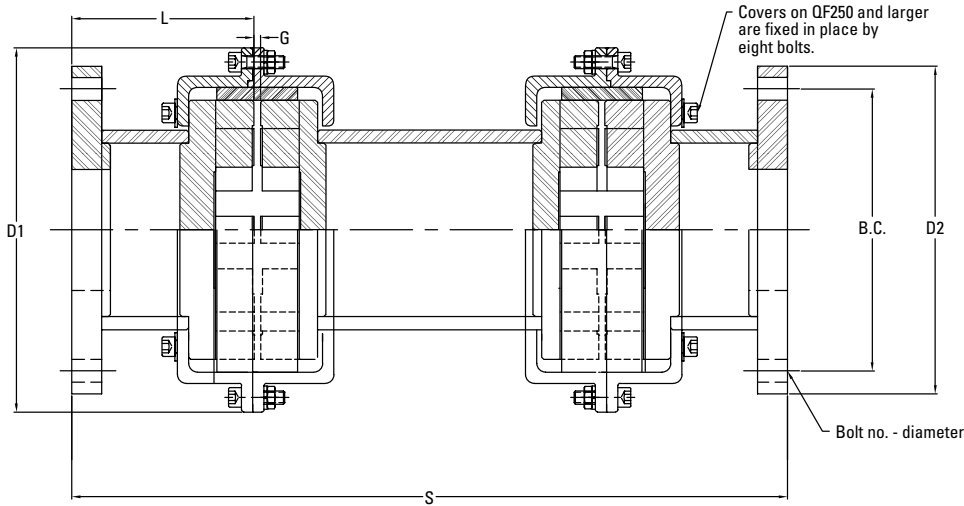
Double-ended spacer flange coupling with high-speed split covers.
